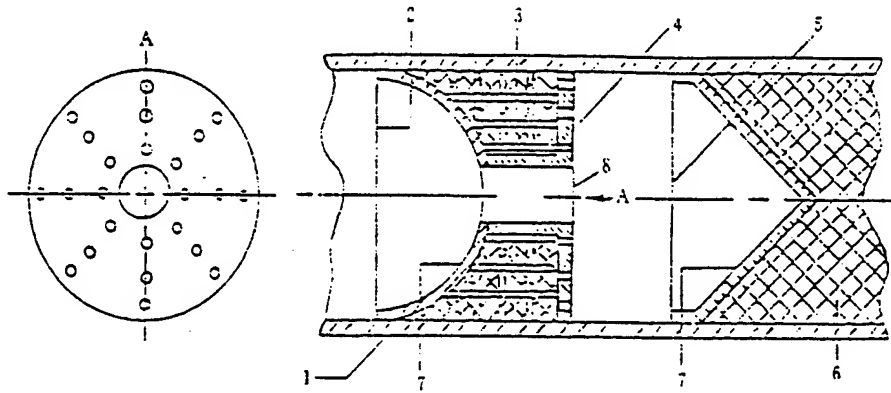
The longitudinal cross section of the tandem hollow explosive warhead
